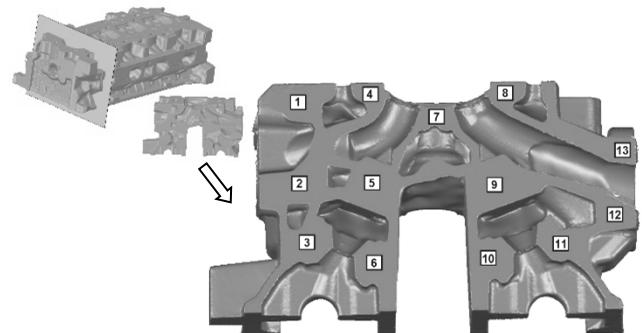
Surface of cross-section of the cylinder head with marked locations of the hardness measurements
